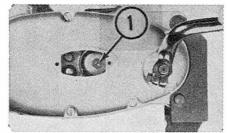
View of clutch adjusting screw on 4-speed 100cc models. Refer to text for adjustment procedure.
